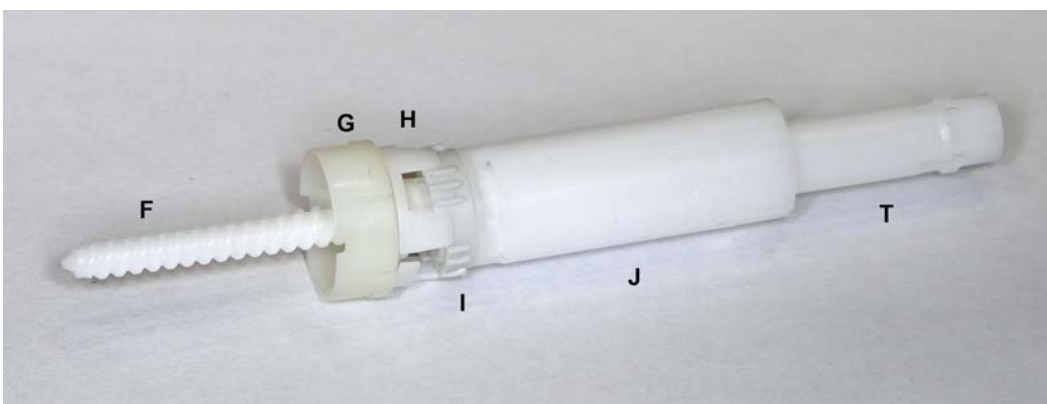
FlexTouch pen jackscrew “fully accessorized”
